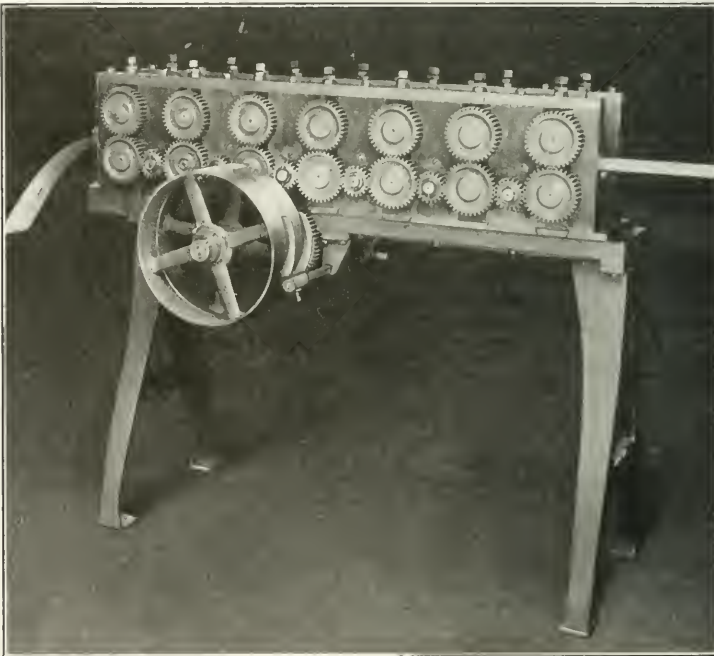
Cadwell-Vernon Sheet-metal Rolling Machine
